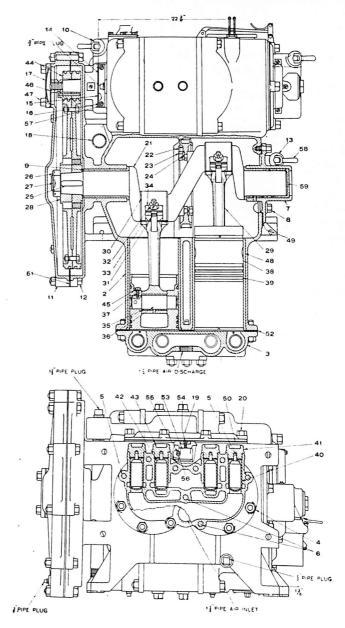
Outline and Section Views of the D-3-F Air Compressor
